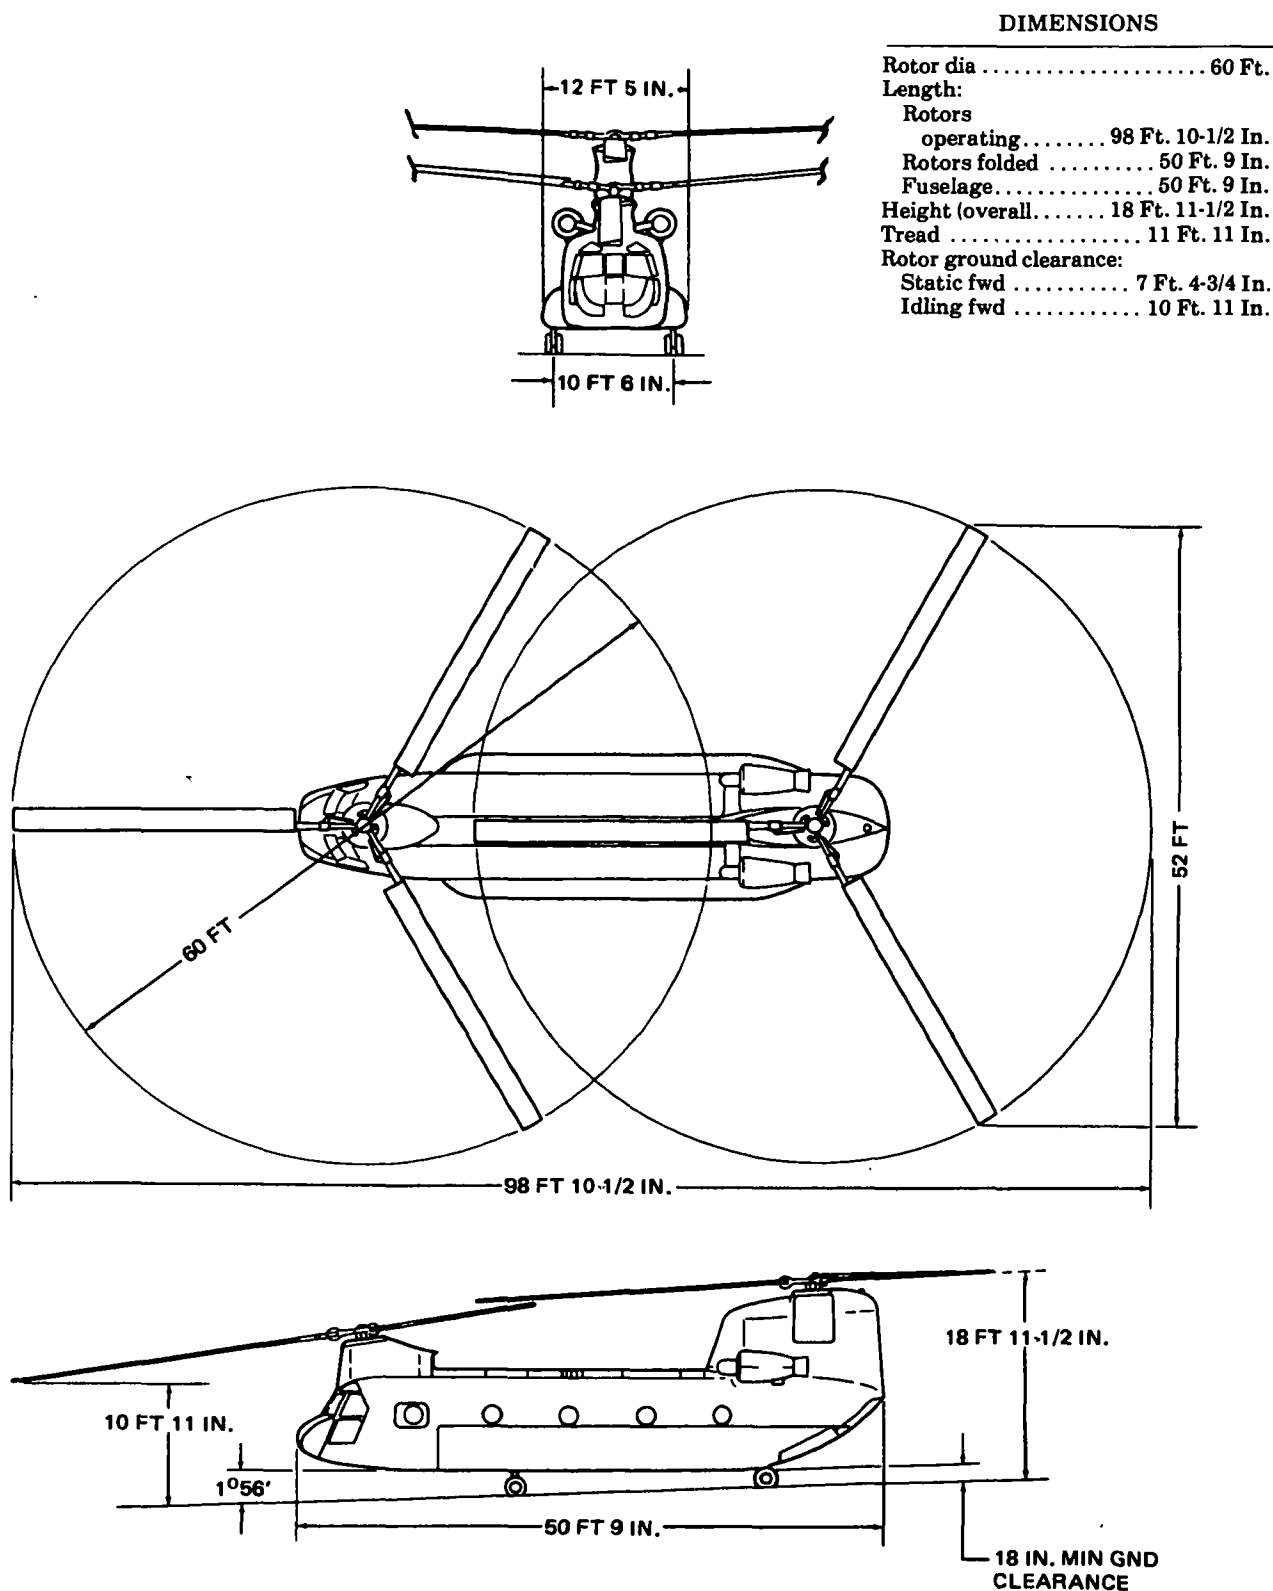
Principal Dimensions, CH-47B and C (Chinook)
